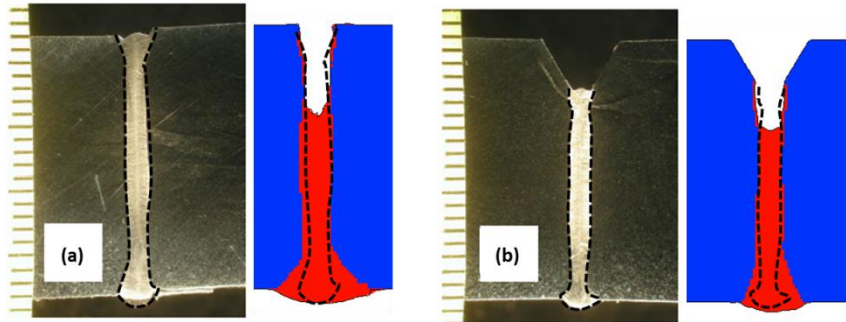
Cross section bead shapes in AISI316L cases; (a) 19kW case; (b) 16kW case with V-groove
